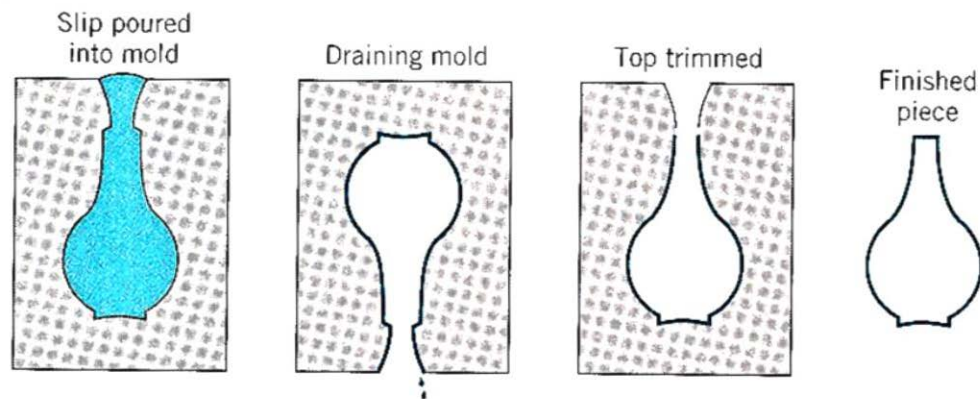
Schematic of the production of ceramic parts using a slip casting technique.
